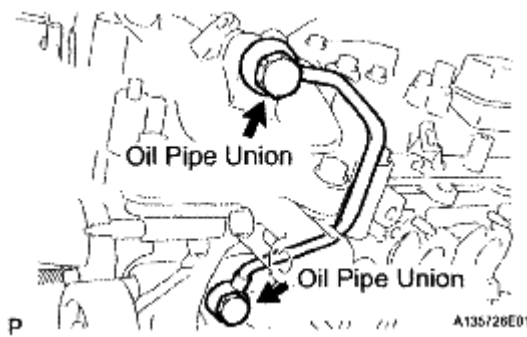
Removing Oil Control Valve Filter LH And Gaskets
